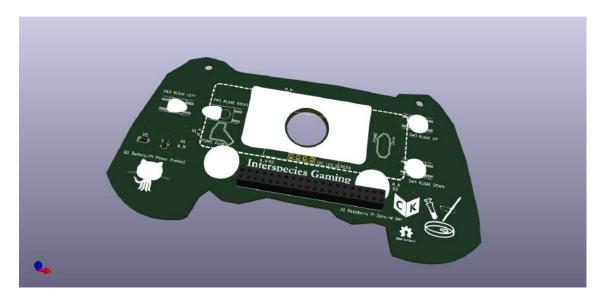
LabFromAChip surface mount PCB render in KiCAD software
